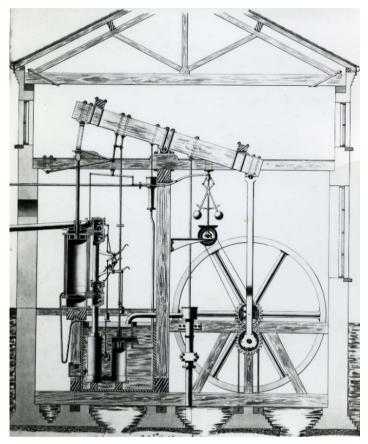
First Steam Engine Drawing. (Kingsford, 2019)
